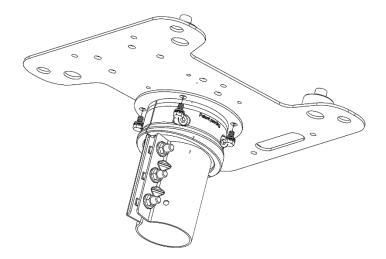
Attach Adjustable Mount Adapter to Maritime Mount Adapter Plate
